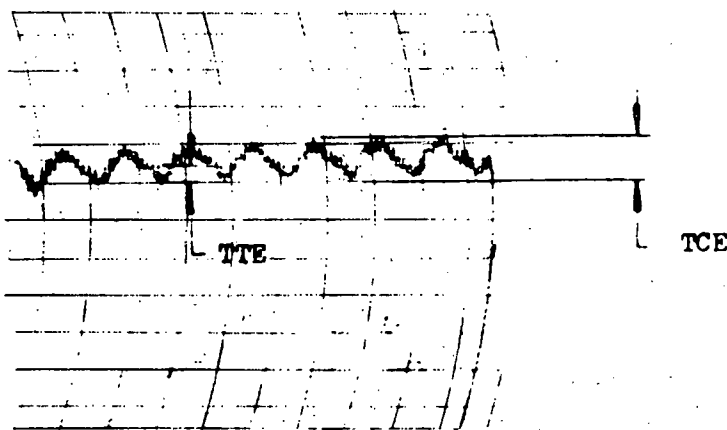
Composite Reading on Fellows No. 4 Redliner Gear Checker
